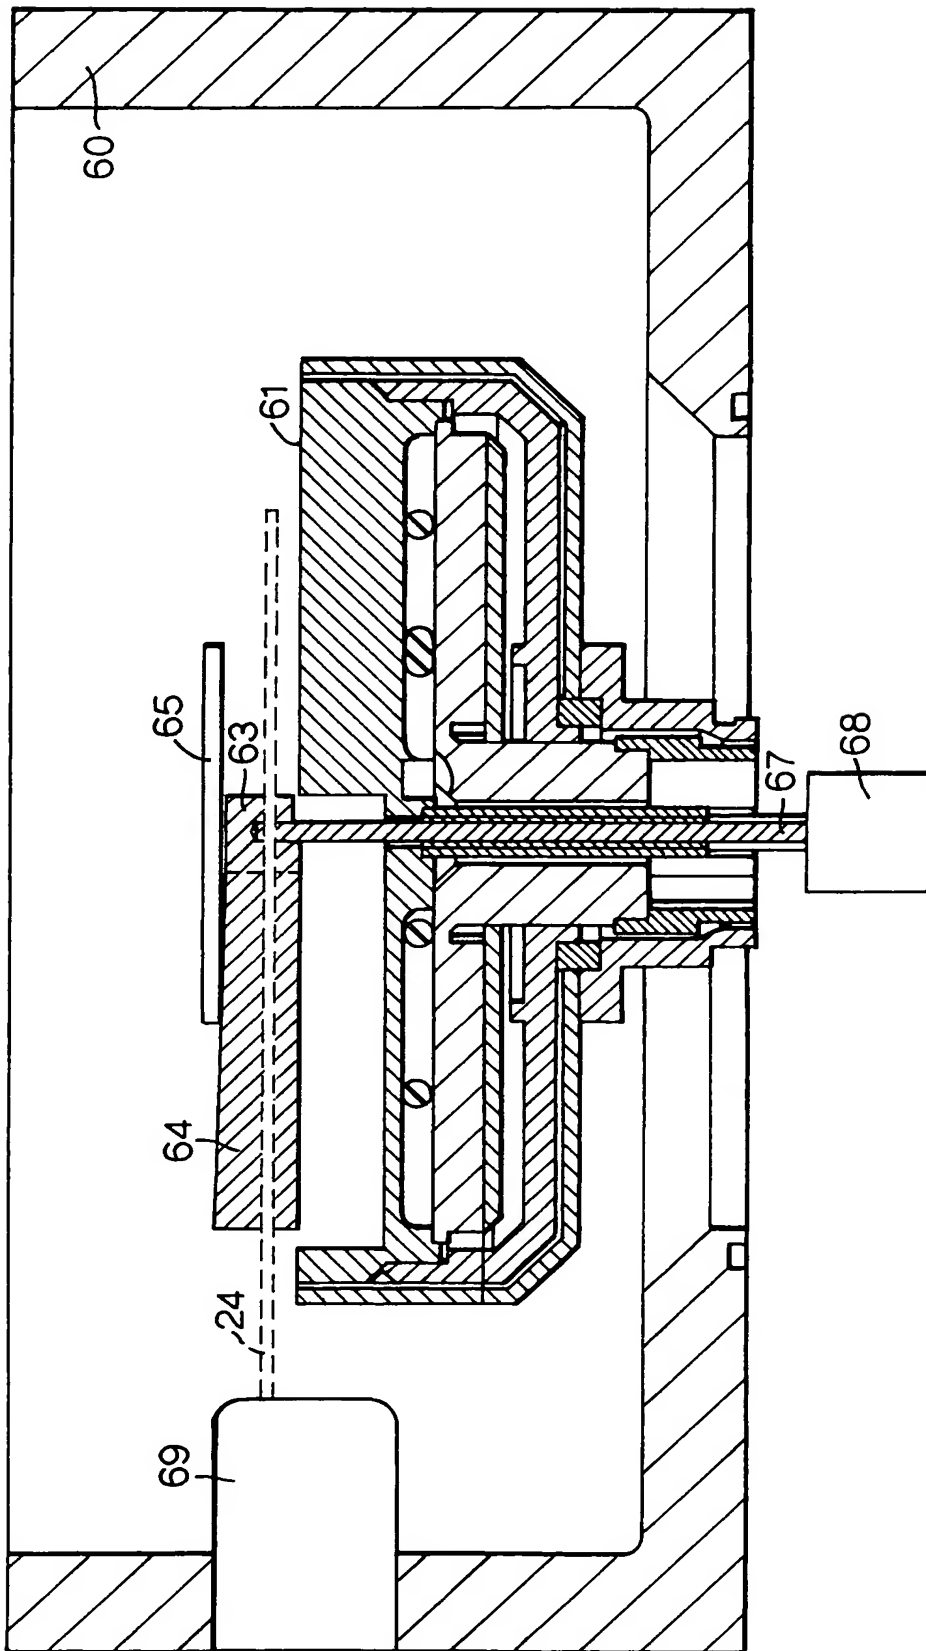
is a cross-sectional view of the device in accordance with the present invention, showing the housing 60, the shaft 63, the bearings 61, the component 64, the component 65, the component 67, and the component 68. The dashed line 24 indicates a specific feature of component 64.
